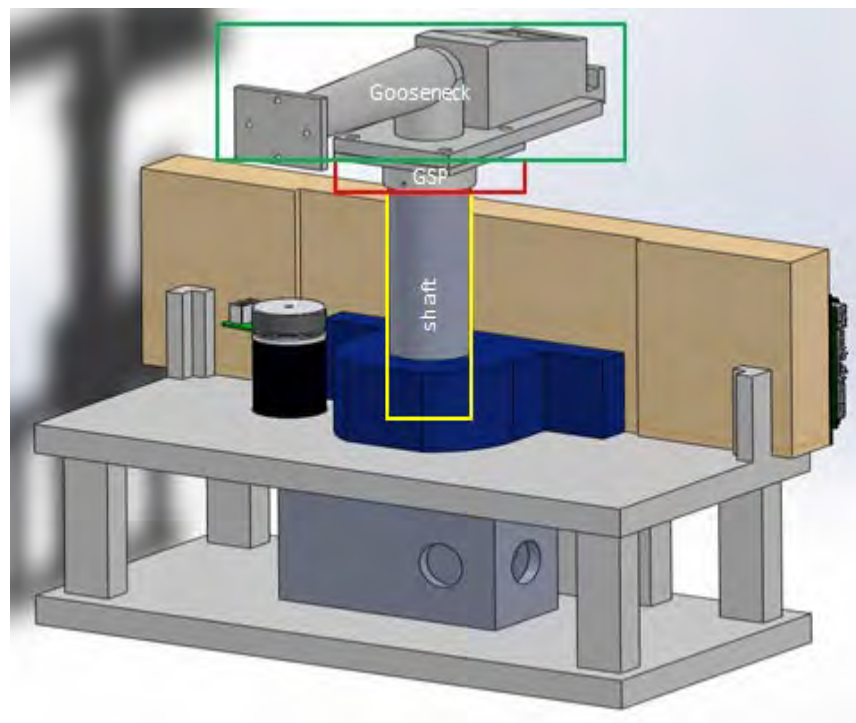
CAD Model of Gooseneck Assembly Integrated with the Support Shaft
